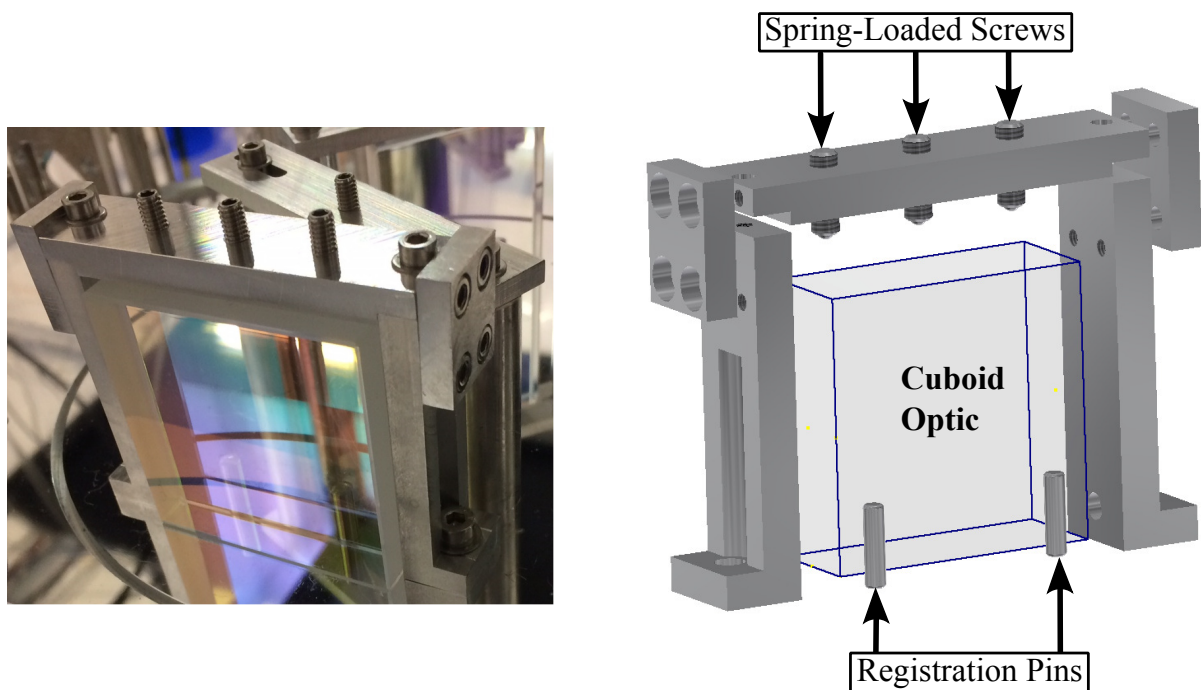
Photograph (left) and 3D technical drawing (right) of the Π -shaped frame for cuboid substrates.
